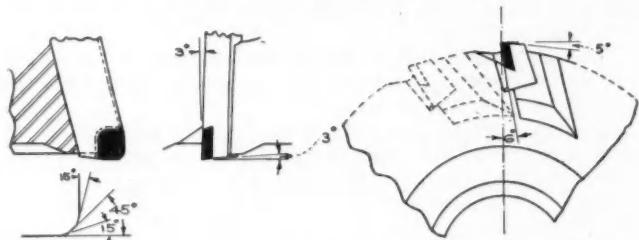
CUTTER ANGLES RECOMMENDED FOR MILLING CAST IRON
